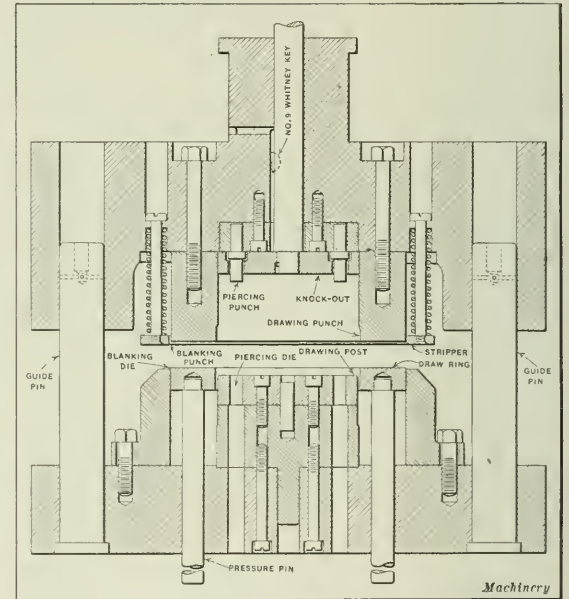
Combined Blanking, Drawing, Forming and Piercing Die for Automobile Muffler Cups
